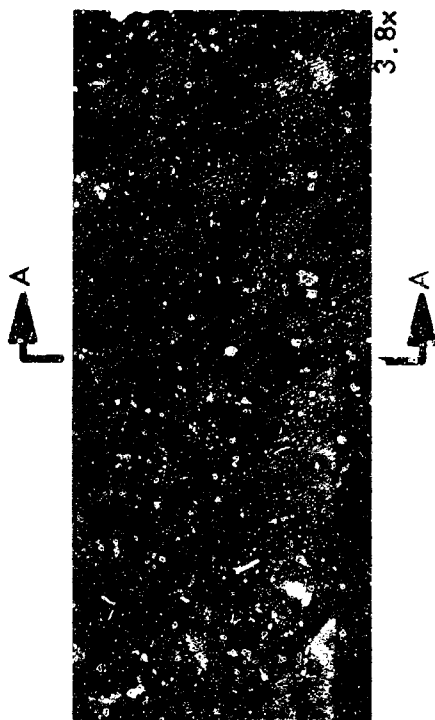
CRACK PATH AND FRACTURE APPEARANCE IN 2021 T81 ALUMINUM WELDMENT (Specimens A2-3 And A2-4)
